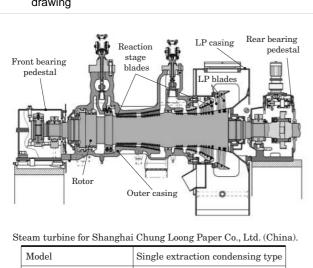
N Series steam turbine, assembled cross-sectional drawing
